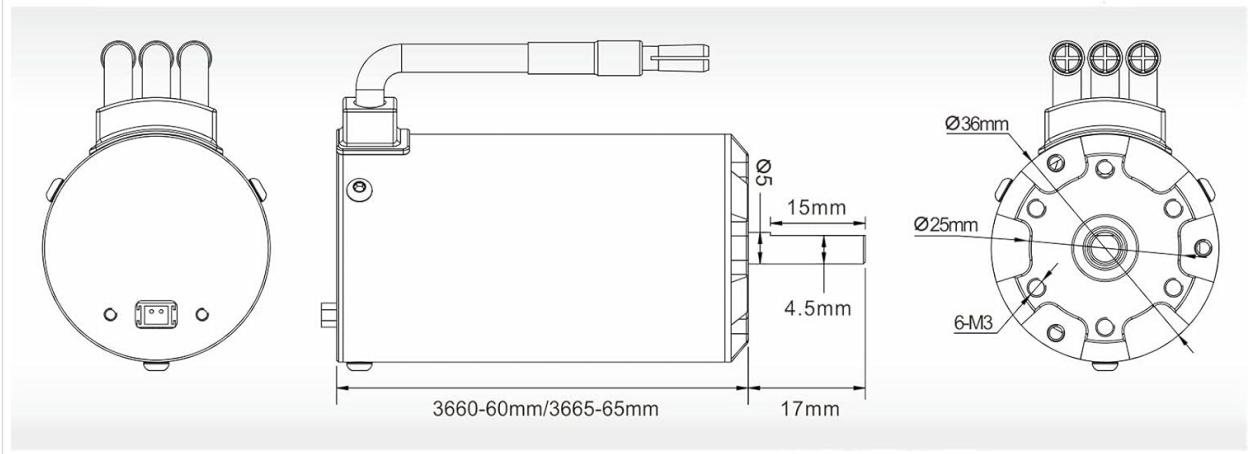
Technical drawing and dimensions of the Supersonic 3660 4-Pole Brushless Motor, including diameter, length, and shaft measurements.
